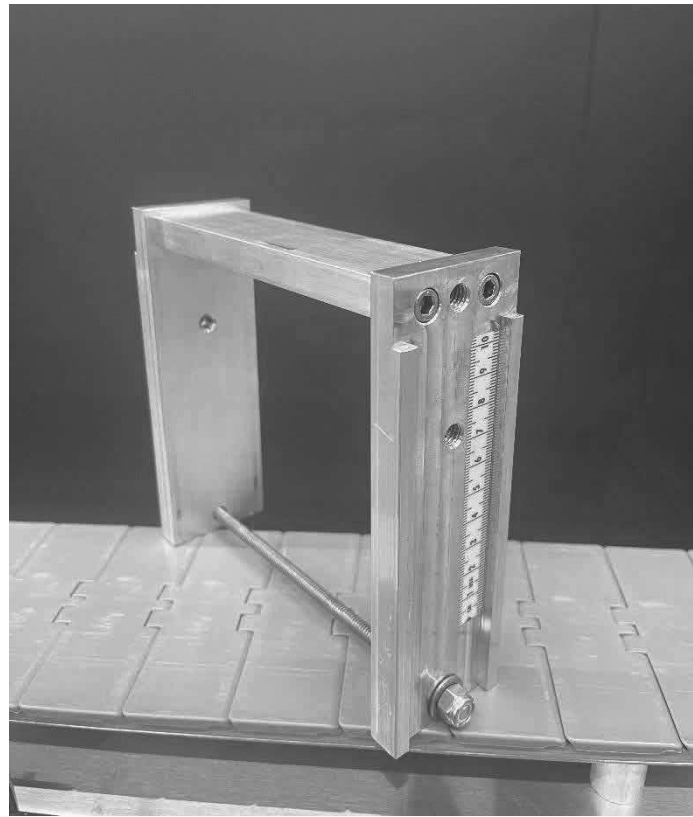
Standard Mounting Assembly for Deitz CV 4.5 (1 of 2) with Short Vertical Adjustment Bars
